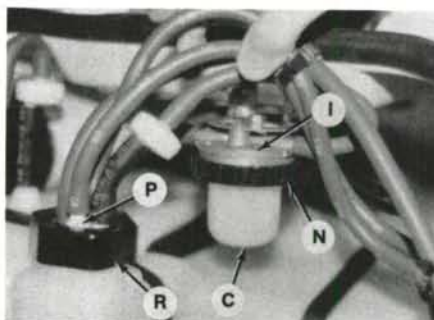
Ring nut (R) secures pickup assembly (P) in fuel tank. On JS650SX models, a sediment bowl assembly (I) is used. Unscrew ring nut (N) to withdraw cup (C) with sealing ring.
